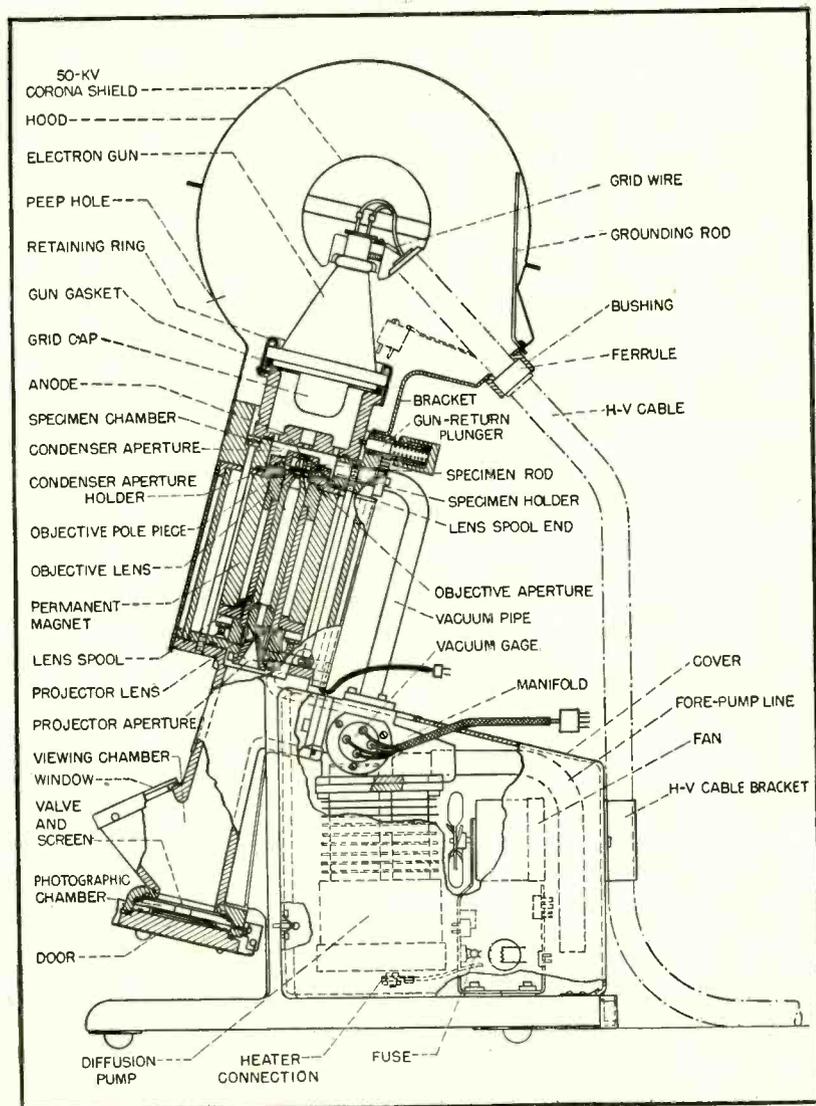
Cross-sectional drawing of the microscope column, showing the location of component parts
